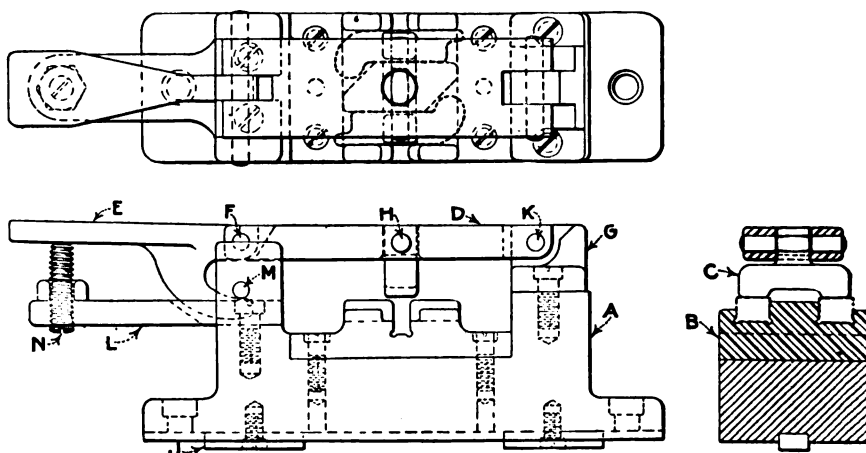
ANOTHER SPLINE-MILLING FIXTURE
